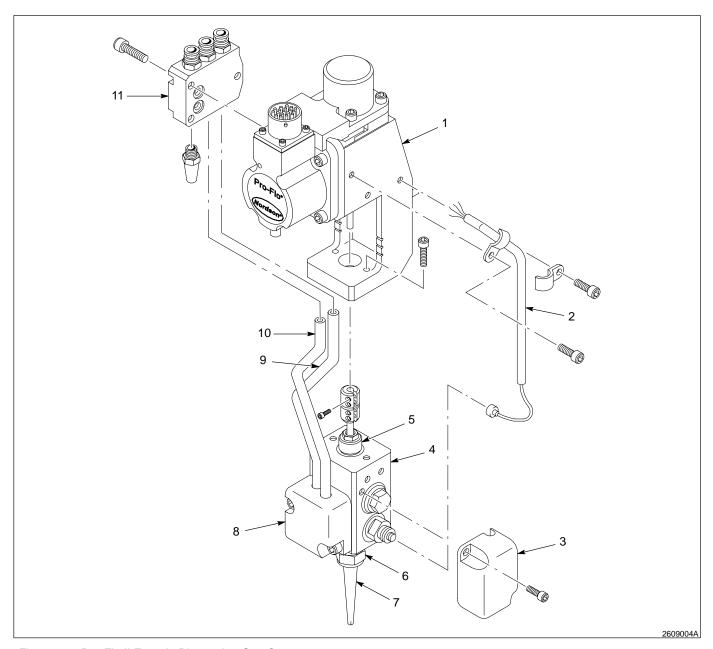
Pro-Flo II Extrude Dispensing Gun Components
